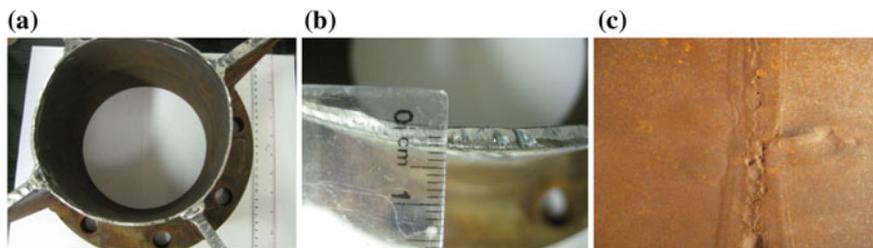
a Failed reducer. b Corroded reducer wall (from original 8 to 1.5 mm). c Corroded weld inside with pits
